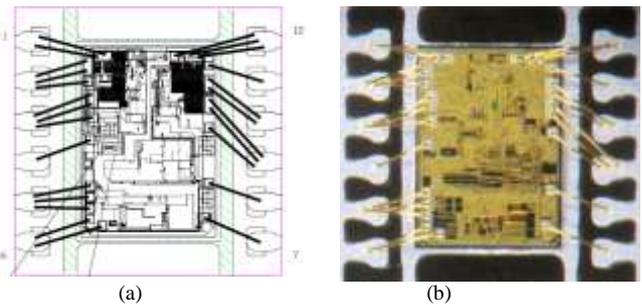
(a) Wirebonding layout configuration and (b) actual bonding appearance of device STOD13ASTPURSV1 on a VFDFPN12 package
